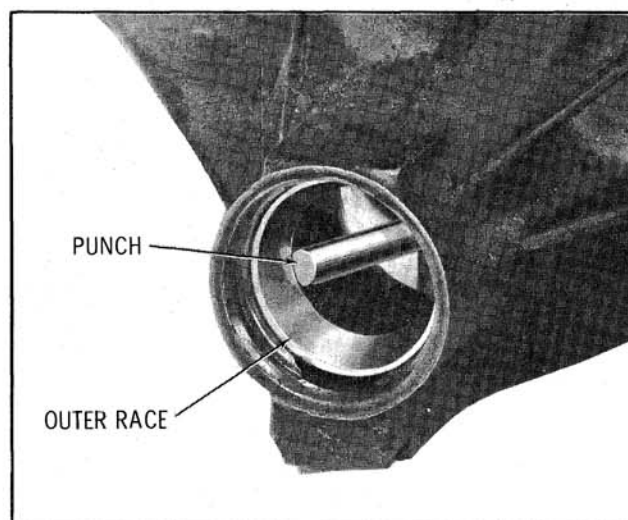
Removing Pinion Front Bearing Outer Race
